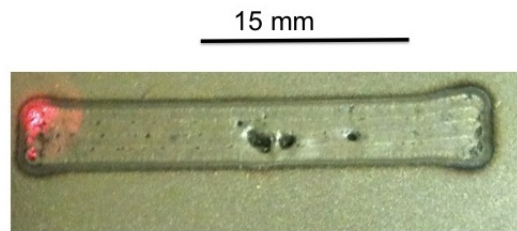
Macro-section of defect free repair, after HIP treatment, produced using power of 0.5 kW, 150 mm/min welding speed and 2.5 mm beam diameter. Sample from initial trials.
